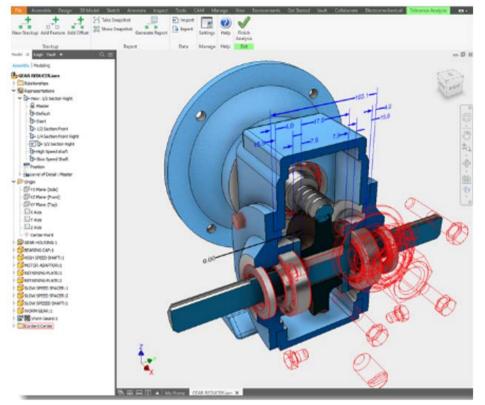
"Tolerance Analysis" module in Inventor [6].
